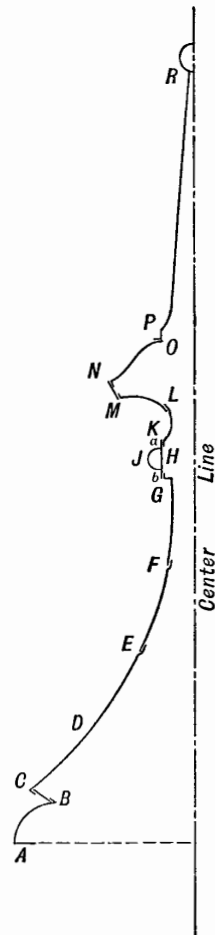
One Half Construction Drawing, Showing Location of Seams and Method of Lapping
